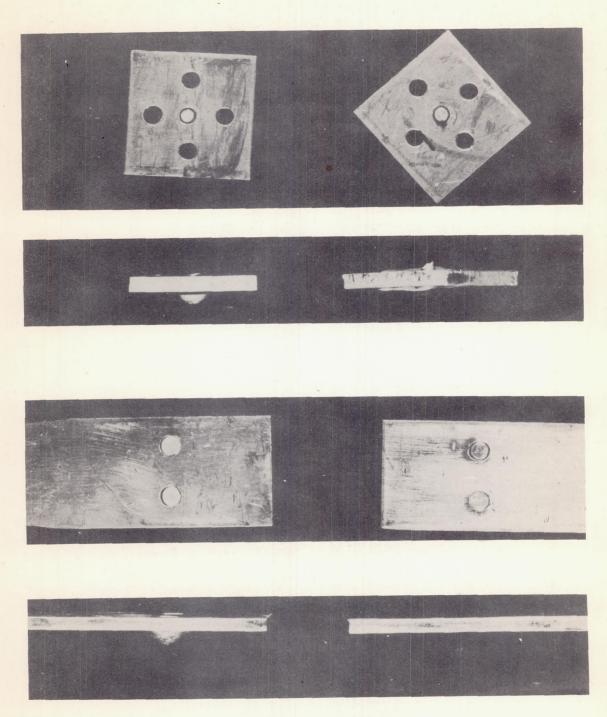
Type 3 failure; rivet fails in shank.
